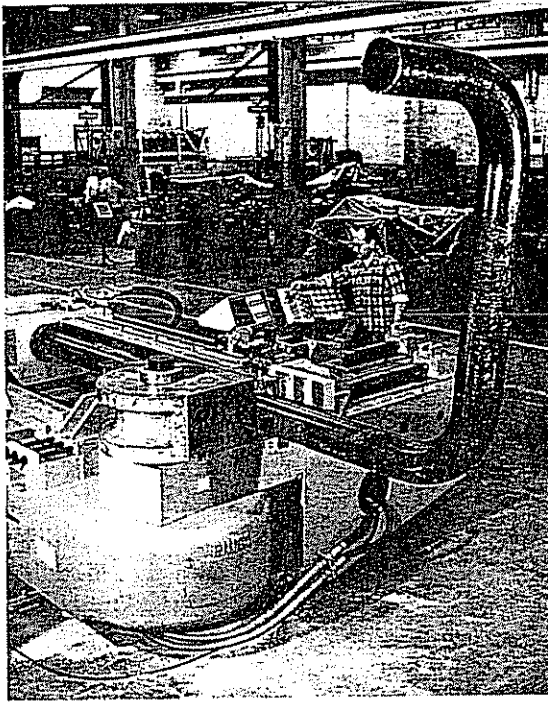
Pipe bending machine with numerical control (courtesy Teledyne Pines)
